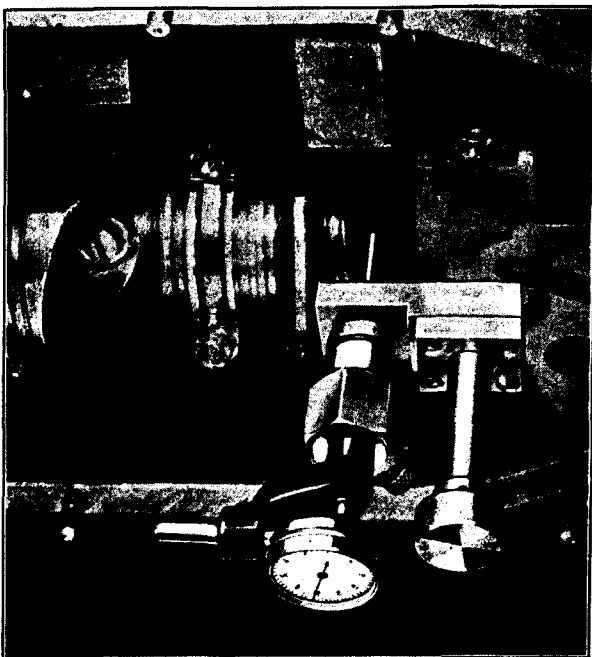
Indicating Front Main Bearing. Indicator 196-B and Holder 65530 with Adapters A and B
